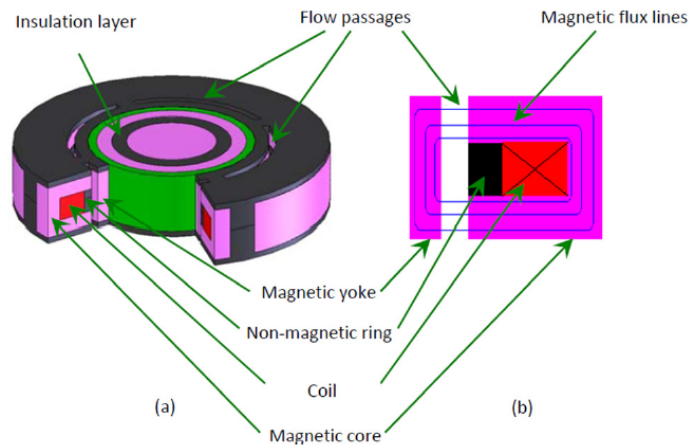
Outer coil subassembly for flow mode (inner coil assembly is also shown in the center): (a) Isometric section view and (b) front section view
